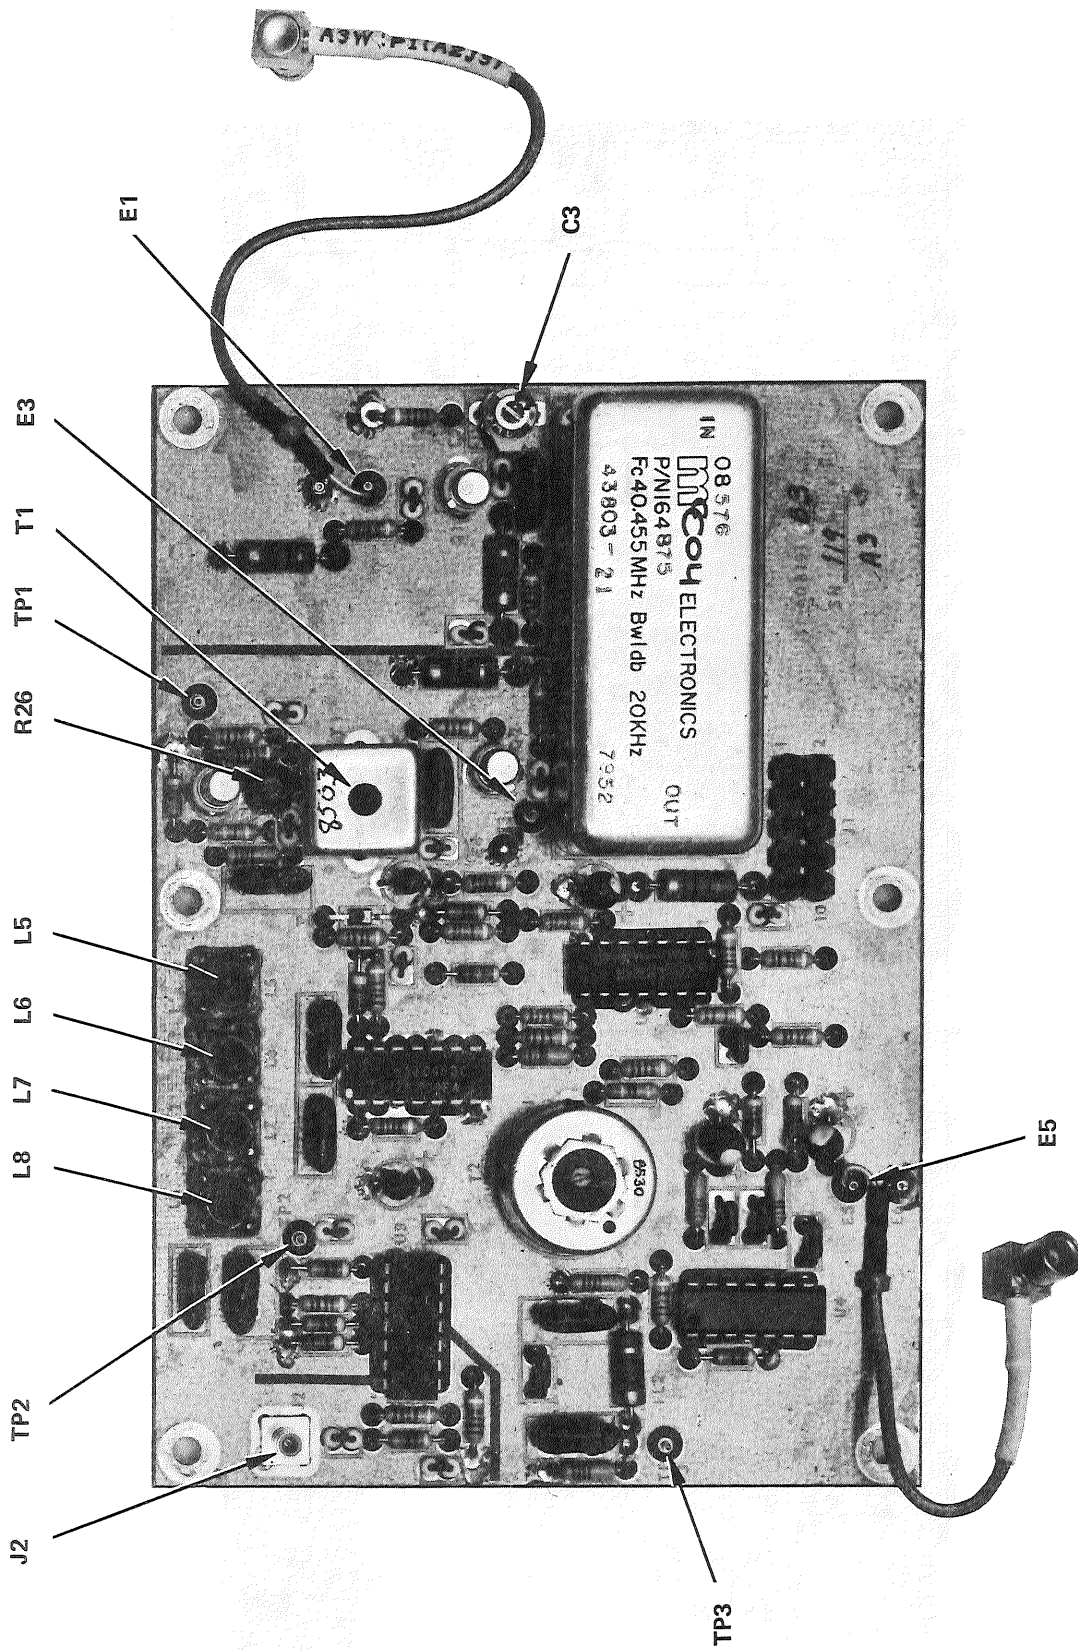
A. Second Mixer, Circuit Card Assembly A3
